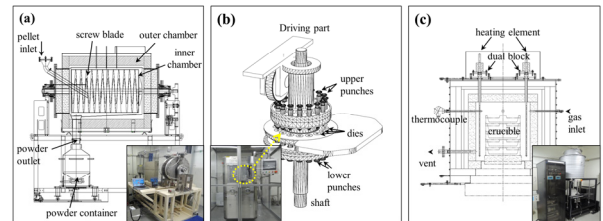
Schematic drawings and photographs of (a) rotating drum furnace for oxidation, (b) driving part of rotary press for pelletizing, and (c) sintering furnace constructed in PRIDE.
